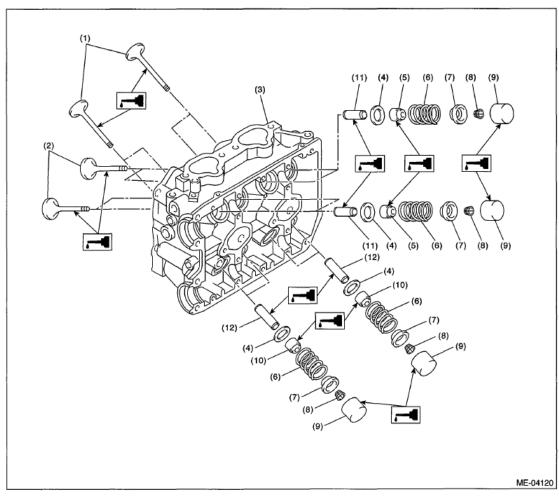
Removing Valve And Valve Spring Courtesy of SUBARU OF AMERICA, INC.
